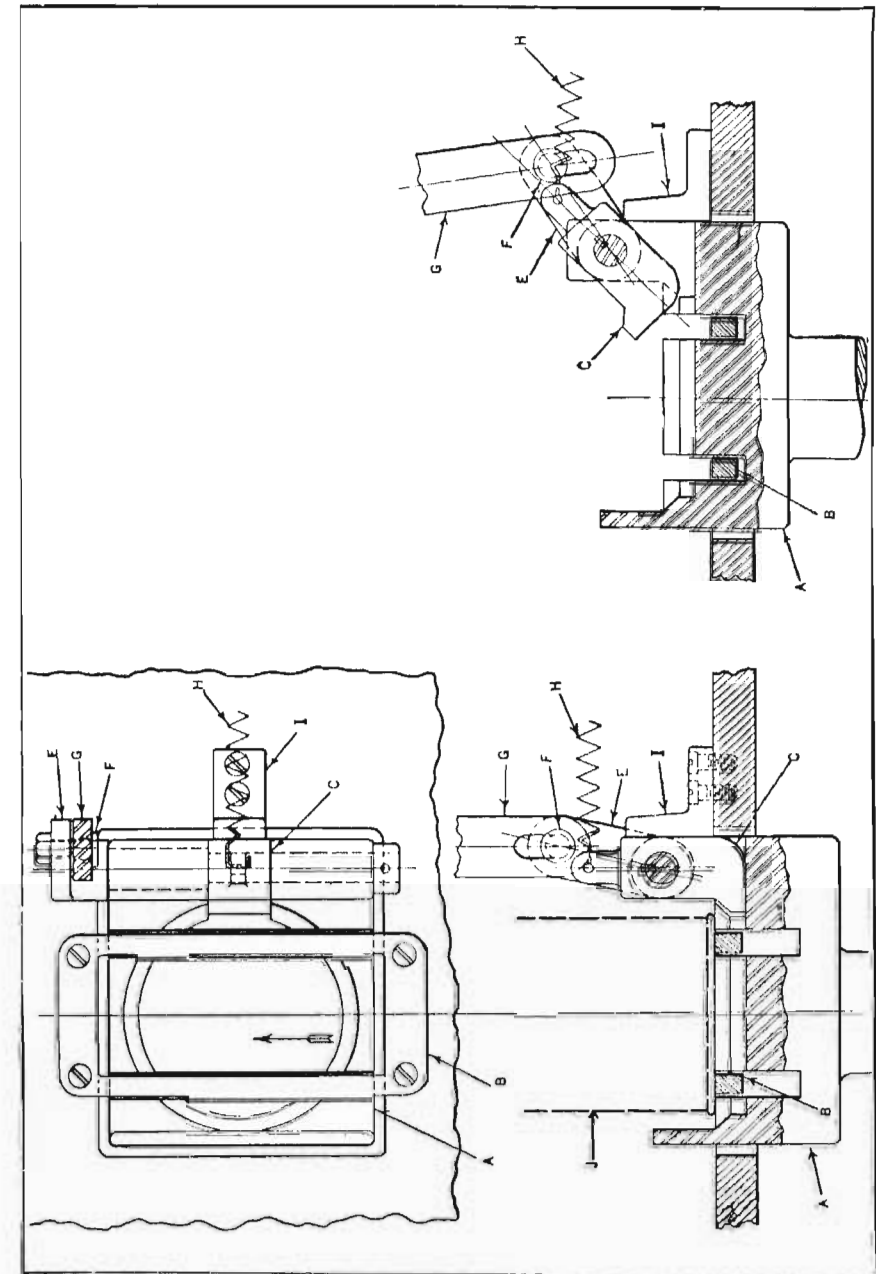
A Machine which Places Covers on Cans is Equipped with this Mechanism which Stops Action of Cover-dropping Mechanism if Can is not in Position
